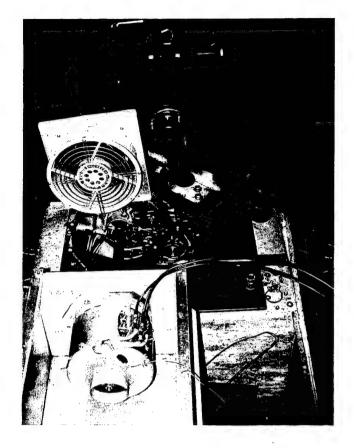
The beltdrive uses a 30 mm x 8mm-pitch drive belt and operates at a 1.4:1 speed multiplication ratio. The alternator support structure mounts directly to the Moller engine. A revised shaft and drive-end bearing carrier were the only modifications required to convert the alternator from direct drive to belt-drive.
